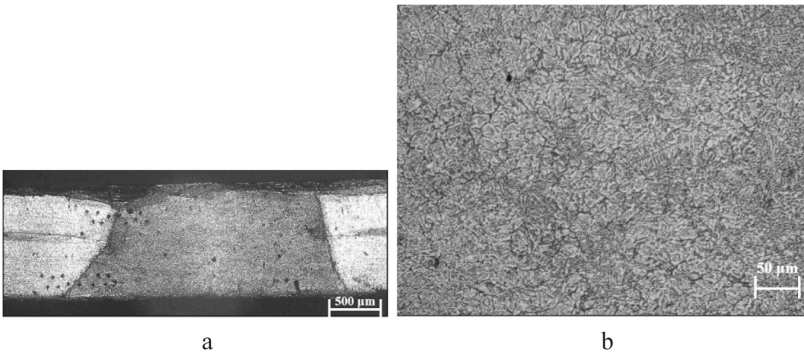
Microstructure of welded joint produced by laser spot welding (a) – general view; (b) – structure of weld metal.
